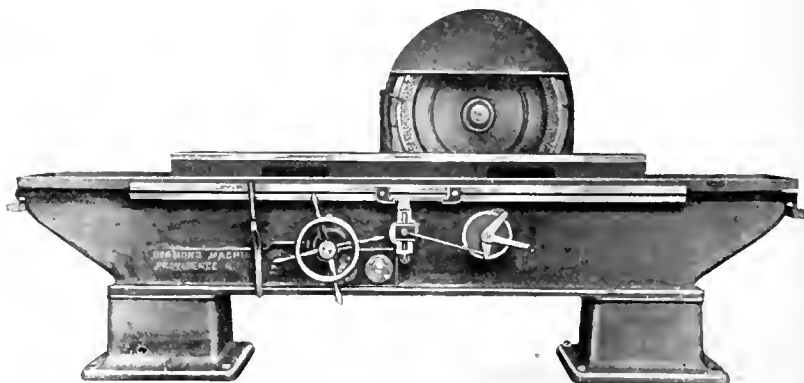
Face Grinder for Finishing Guide Bars and General Work.
